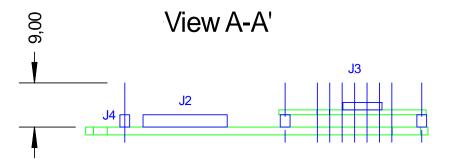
5553 Reader RS232 Compact Multi ISO - Side View
